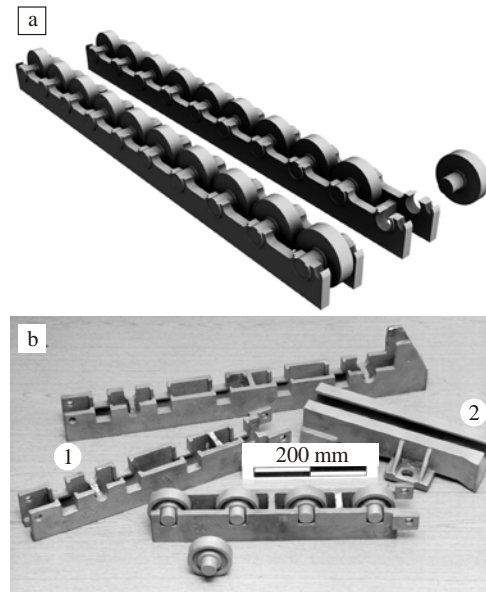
Roller tracks [5]: a) a draft scheme according to IMP Company folder, b) for operation in PeKat 1 or 2 type furnaces made by SECO/WARWICK Thermal SA: 1 – track members, 2 - chain guide mounted between the tracks; material: GX40NiCrSiNb35-18
